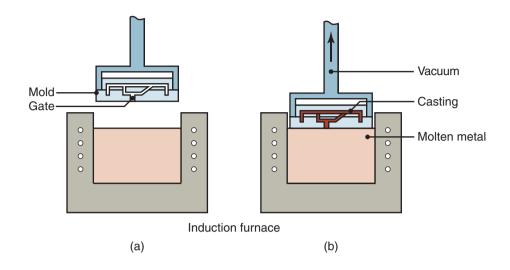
Schematic illustration of the vacuum-casting process. Note that the mold has a bottom gate. (a) Before and (b) after immersion of the mold into the molten metal. *Source:* After R. Blackburn.
